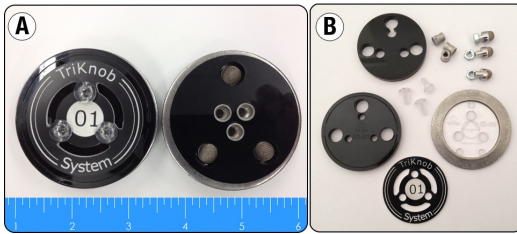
a) Detail of the top (left) and bottom (right) of a laser cut knob; and b) the parts that compose a knob.
